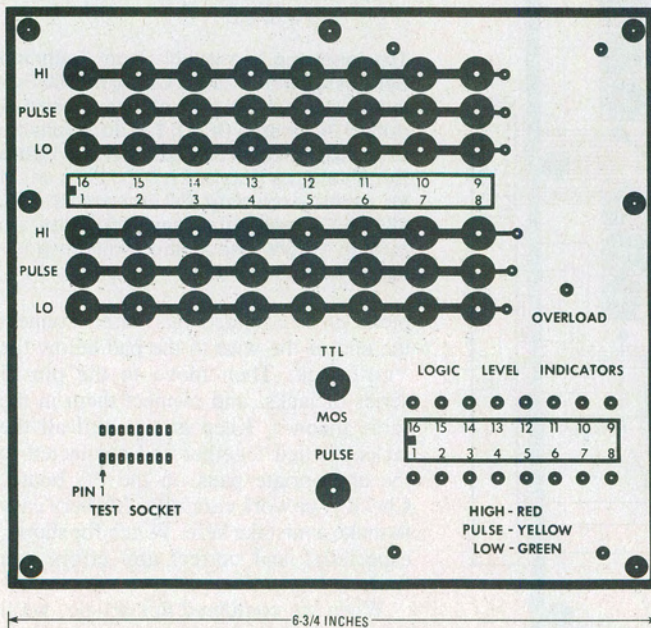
TOP OF PANEL BOARD. Drill out holes at large foil pads as described in text.
